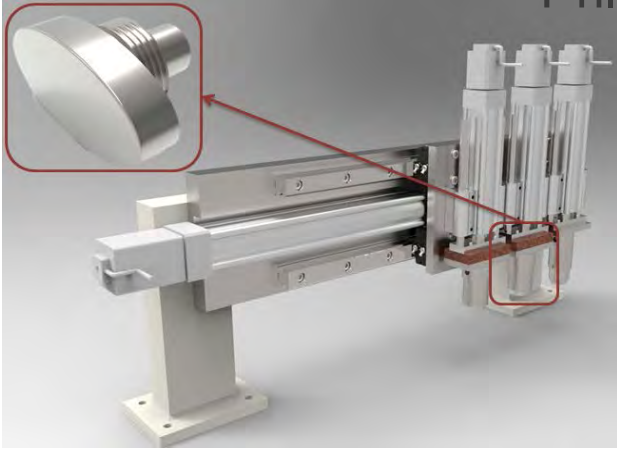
The assembly responsible for the valve placement on the inner tube profile
